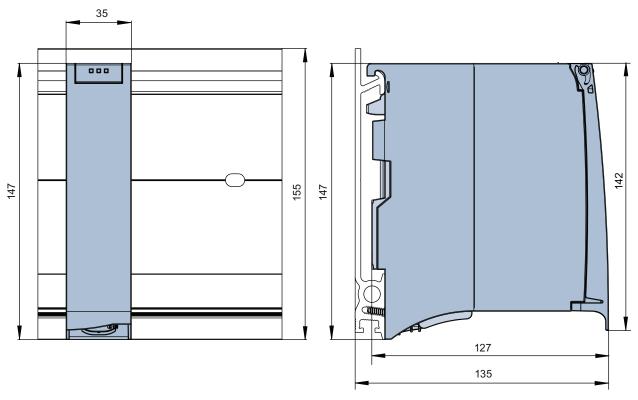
Dimensional drawing of the CM PtP RS232 HF communication module
